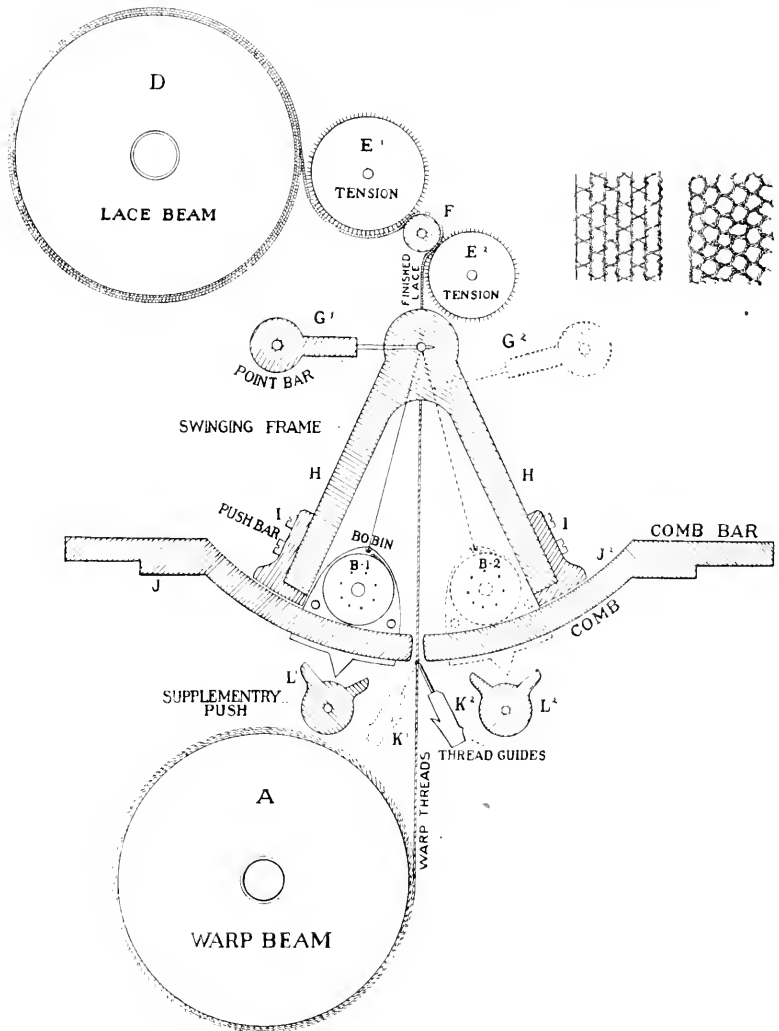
SECTION OF LACE MACHINE ONE-THIRD FULL SIZE.
